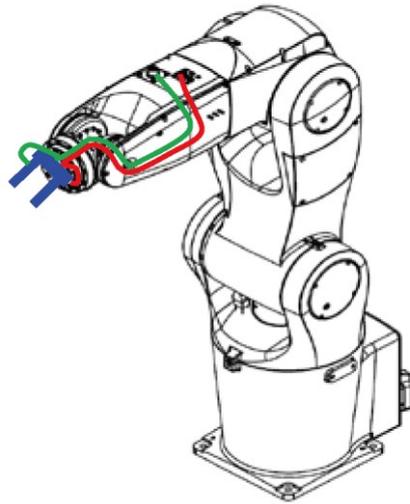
TCP Terminal air pipe and sensor wiring example
